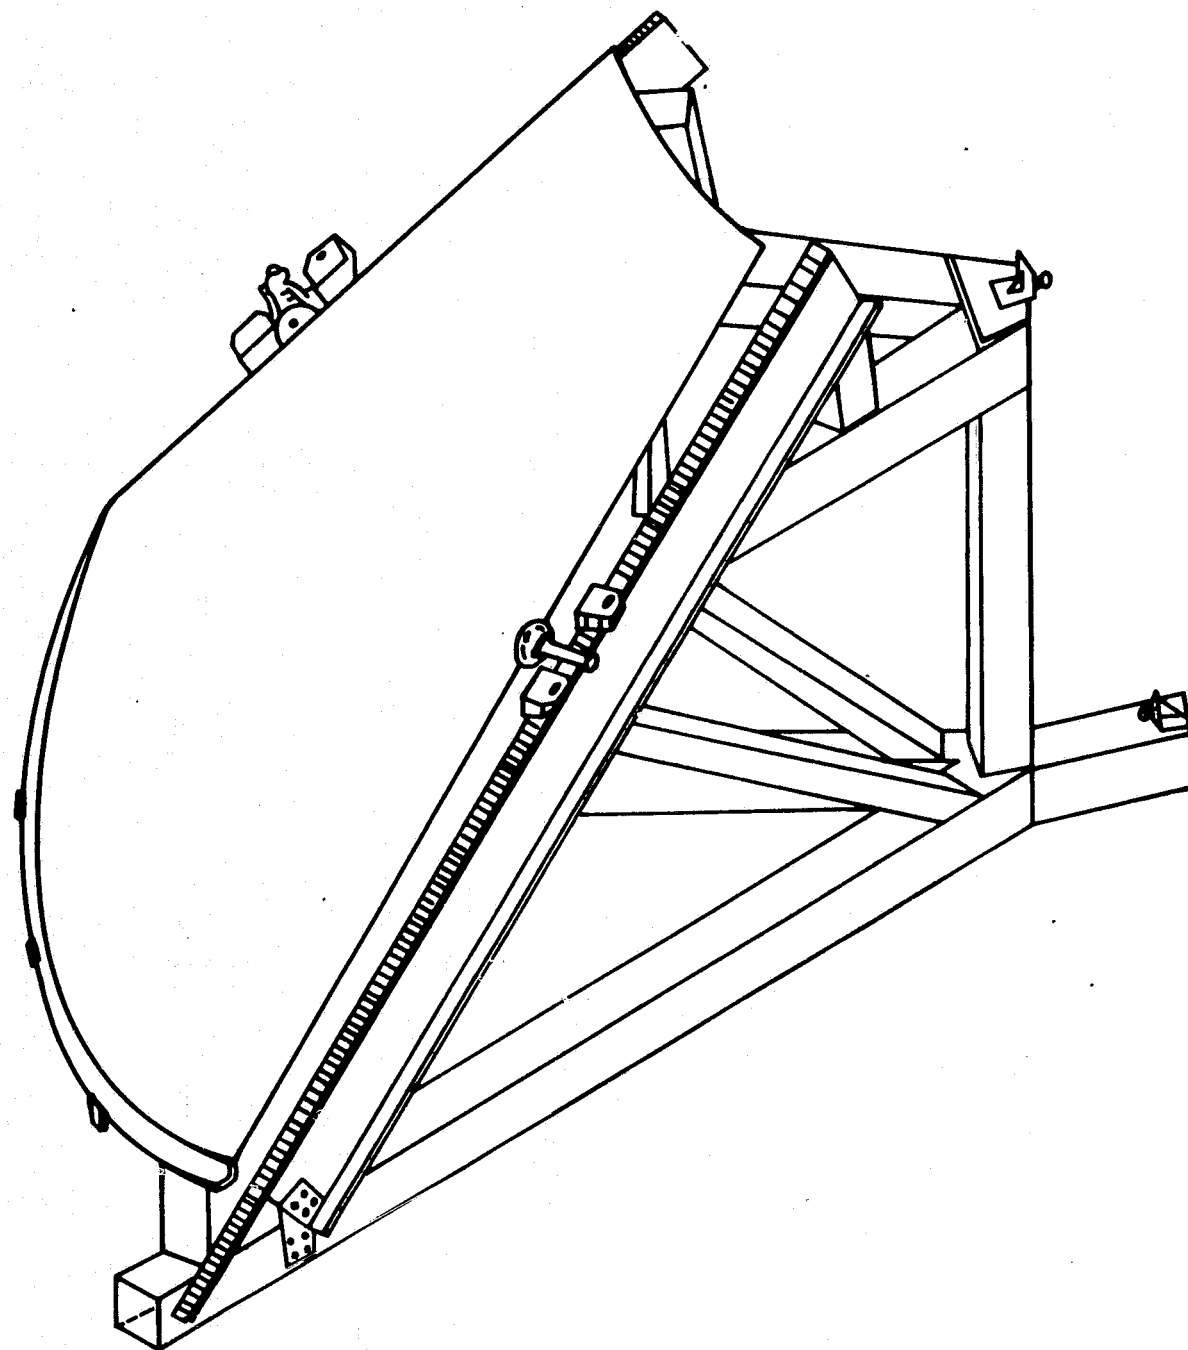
TRIM FIXTURE - INNER AND OUTER FACE SKIN SEGMENTS
